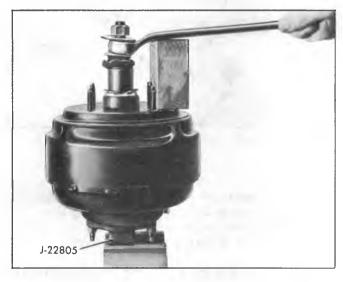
C-Removing Valve Rod, Air Silencer and Filter
